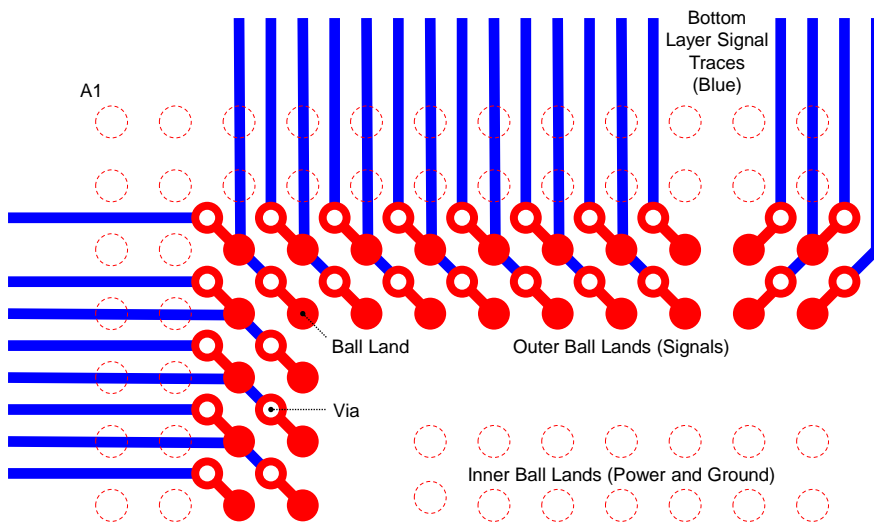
Breaking Out of BGA – Ball Rows 3 and 4 Routed on Bottom Layer
